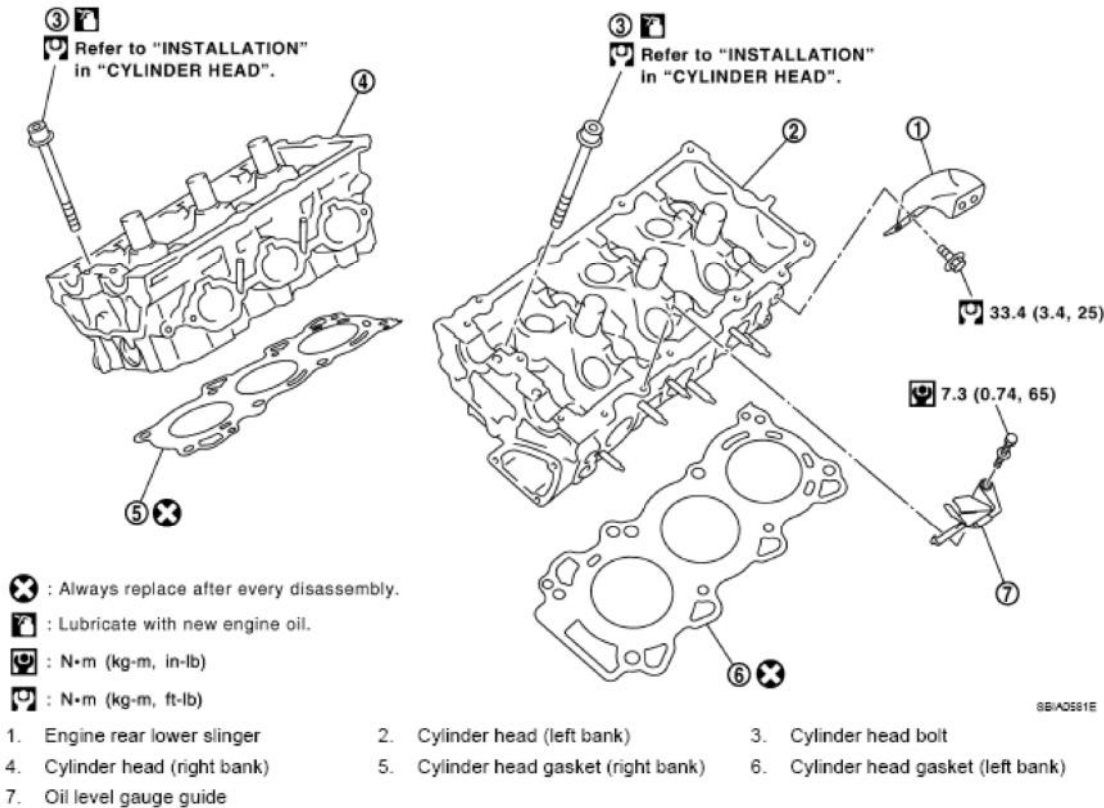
Identifying Cylinder Head Gaskets Components With Torque Specifications
